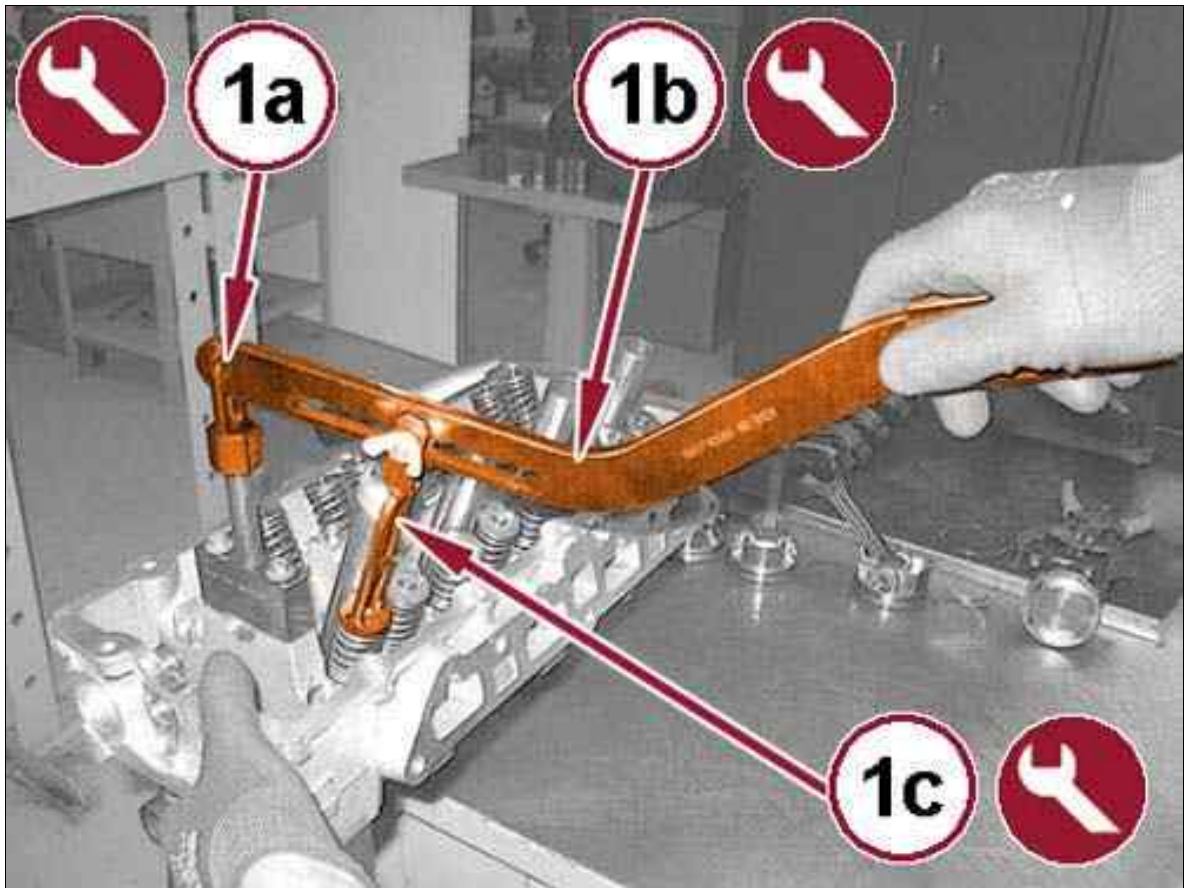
Fitting Valve Retaining Tool & Camshaft Front Support Tool
